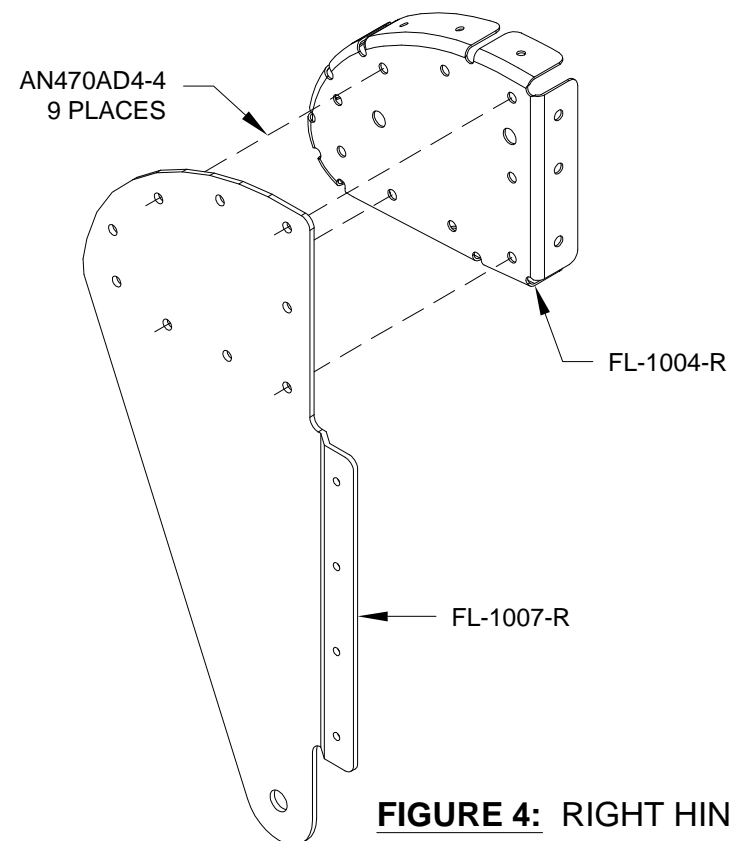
RIGHT HINGE PAIR RIB SUBASSEMBLY
